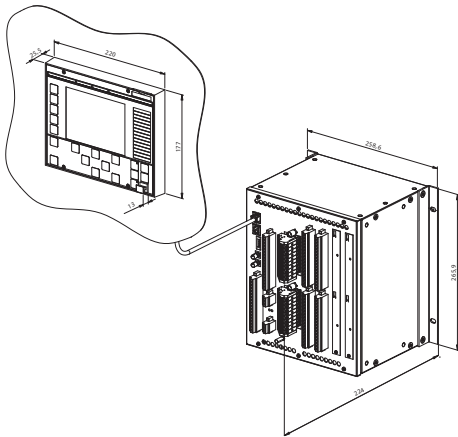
6U half 19" unit wall mounted with two mounting brackets and detached LHM
